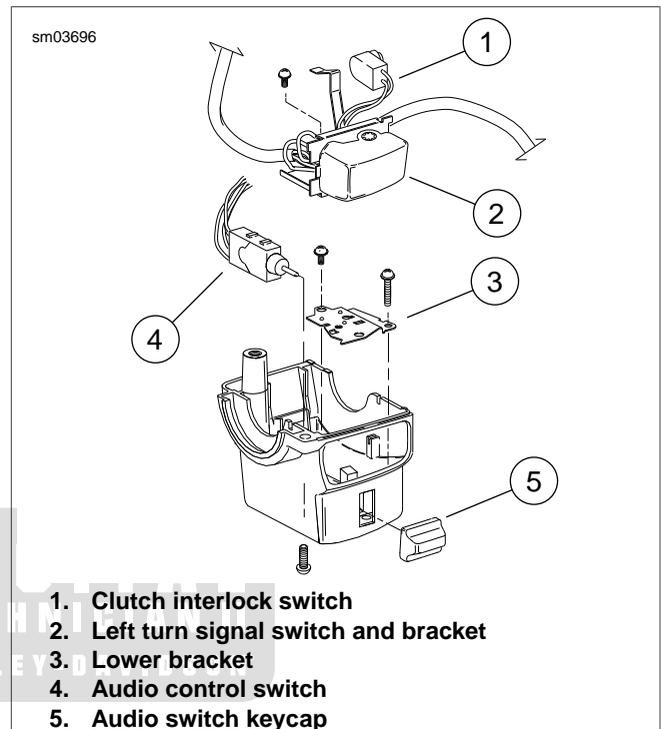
Lower Left Handlebar Switch Assembly (Classic)
